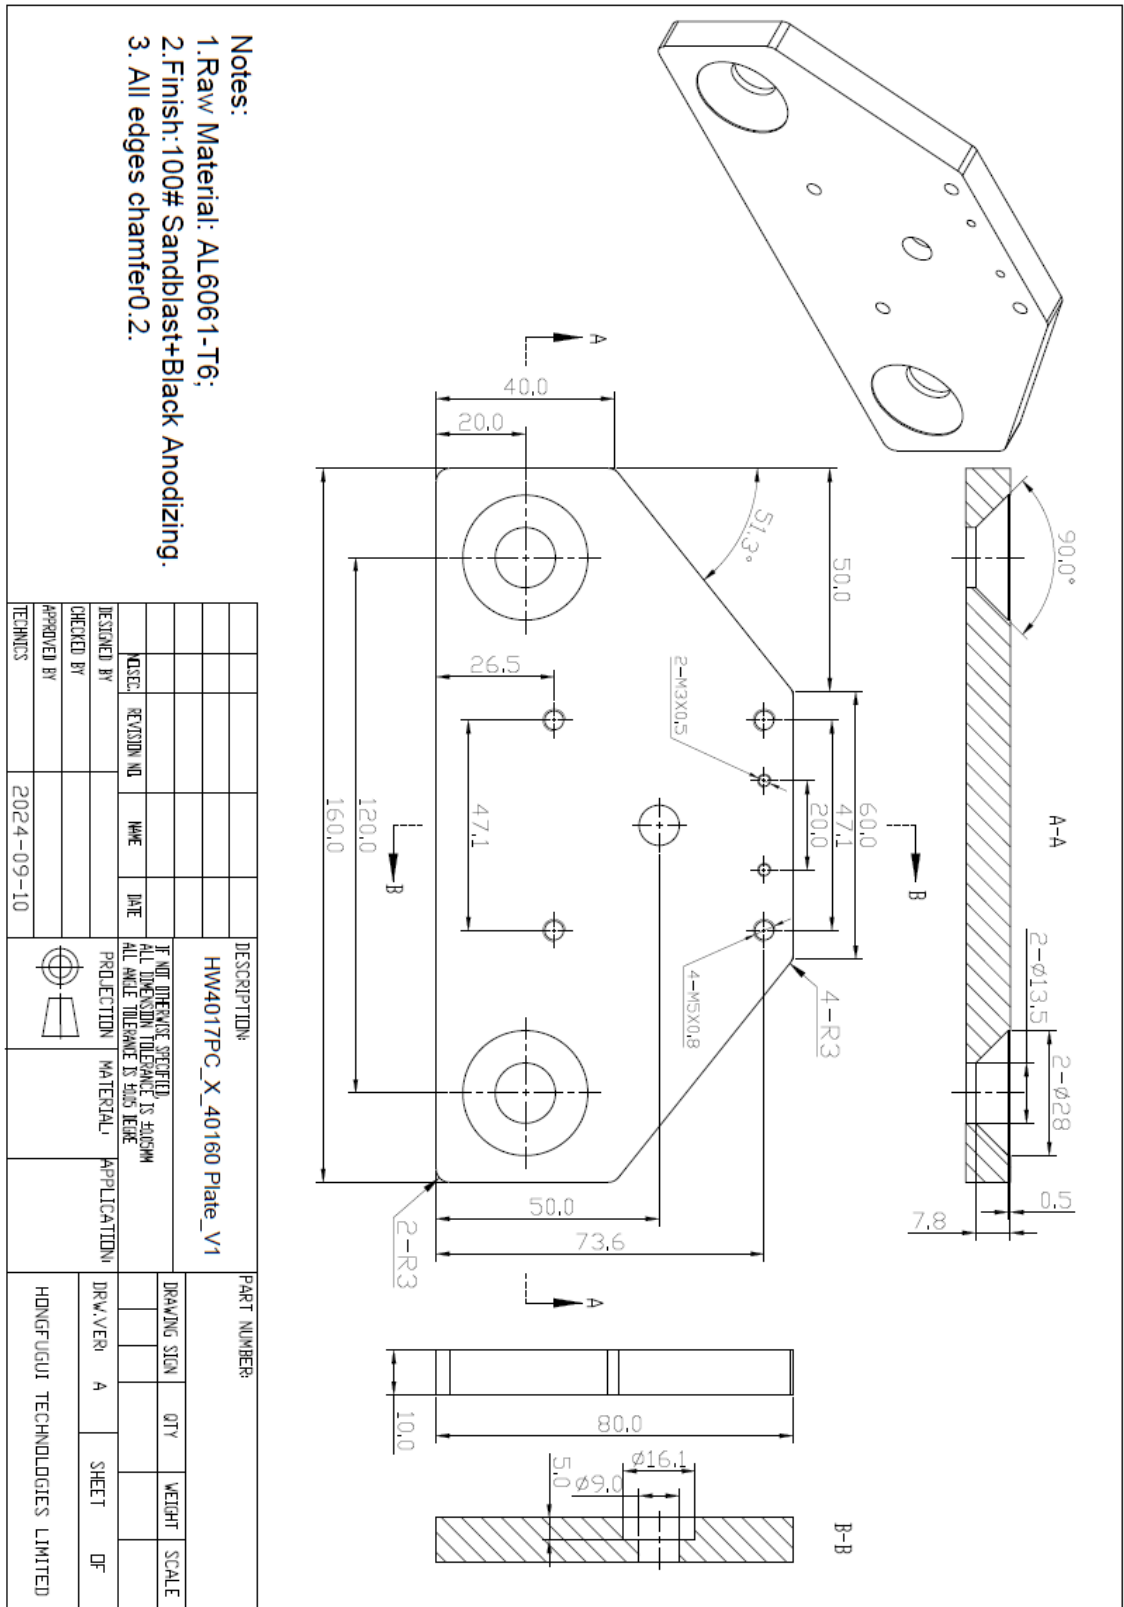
40160 stepper plate technical draw by the manufacturer.
